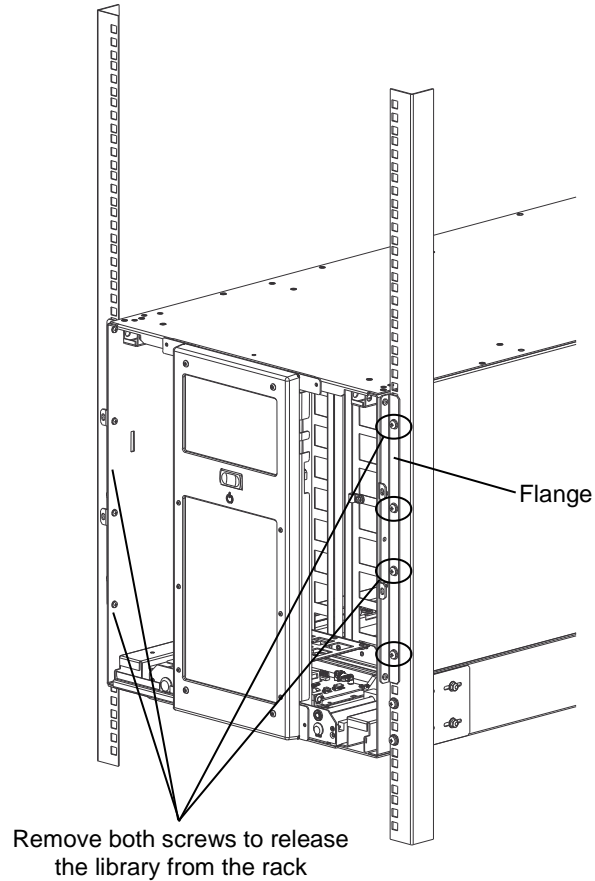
Removing the screws that secure the Library to the Rack (RLS-85XX shown)
